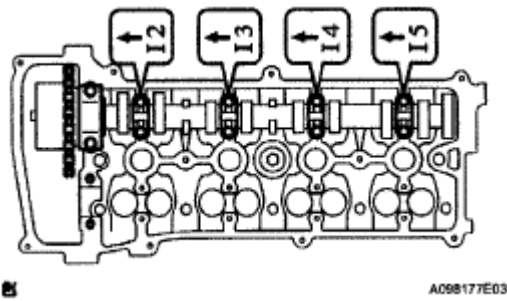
Identifying Bearing Caps Into Cylinder Head Front Mark And Number
